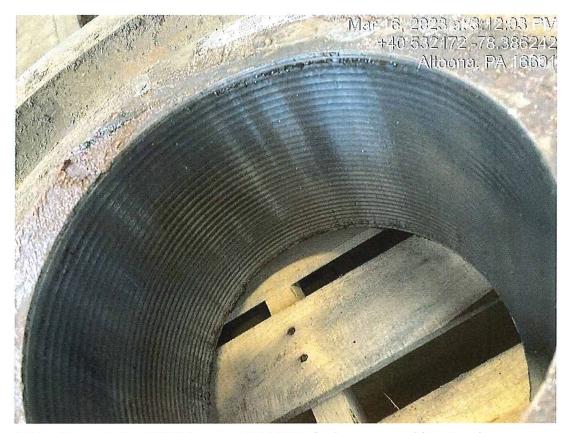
Wheel bore of wheel 05508 from car NS 162581 after being pressed from its axle.
